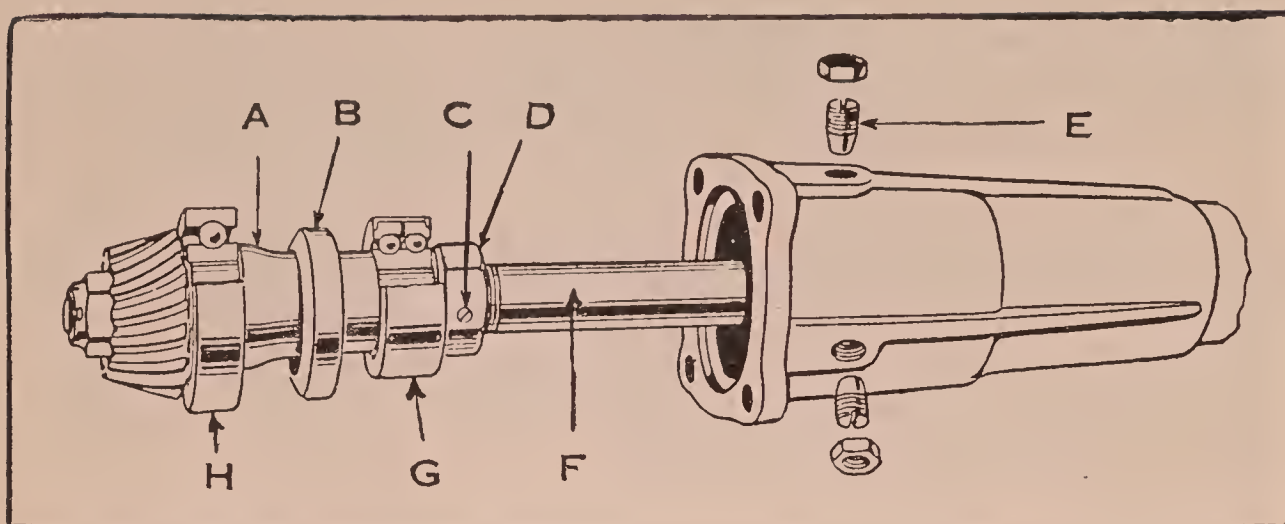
Propeller Shaft (Bevel Pinion Shaft) Bearings
